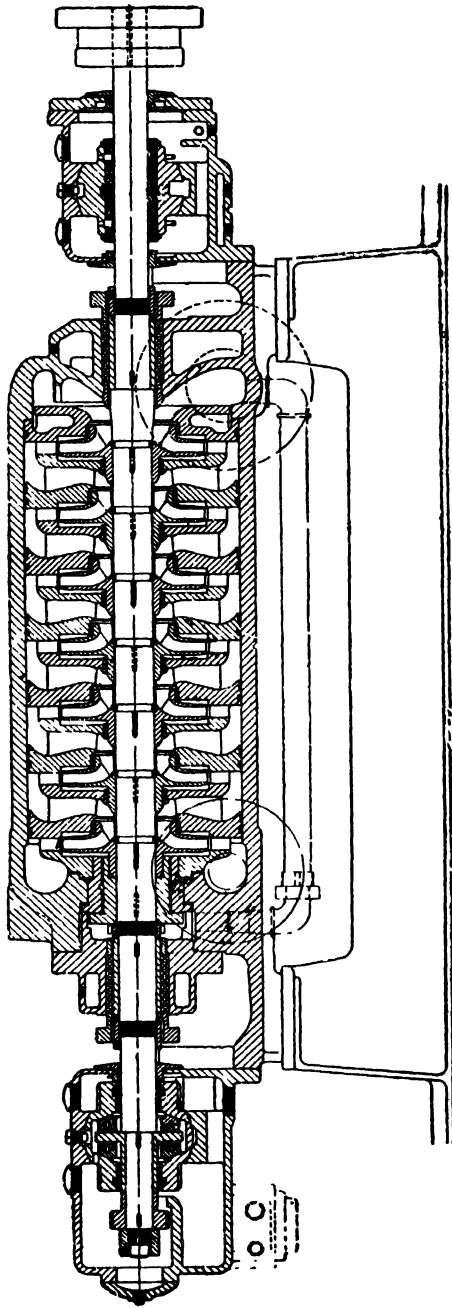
Multistage Centrifugal for Pump for Boiler Feed Purposes, 7-stages (Manufactured by Ingersoll-Rand)
